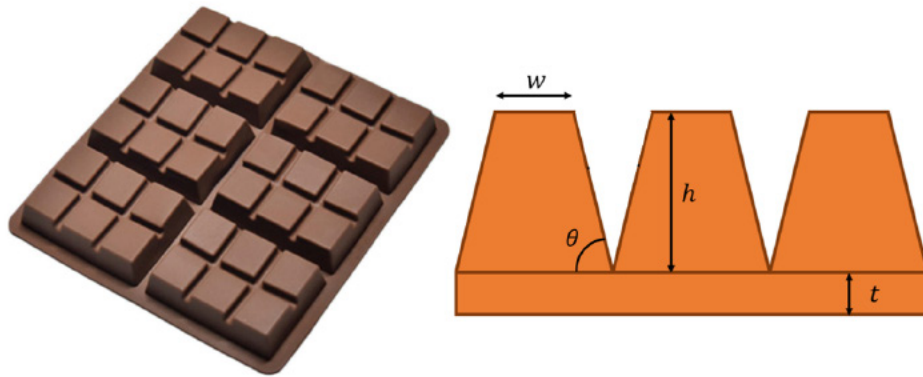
The brown colored mold on the left shows an example of what the final pieces will look like. The orange-colored picture on the right shows a cross section of the “choco-bar” design with w being the width of the inner surface, θ being the angle of curvature of the trapezoid, h being the height, and t being the thickness of the base. Source: [14]
